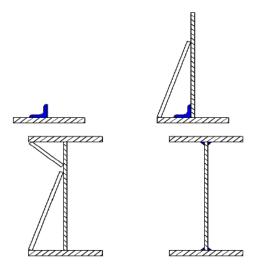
Fit the flanges to the web andthen complete the fillet welding
